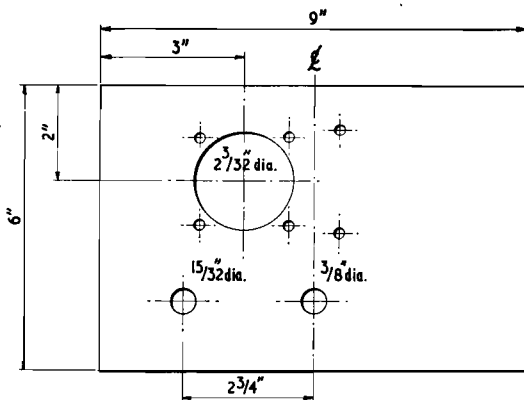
Drilling details for the front panel of the 70 Mc/s transmitter. The exact positions of the meter fixing holes and above-chassis screen fixing holes are not given here, these best being marked out after assembly
